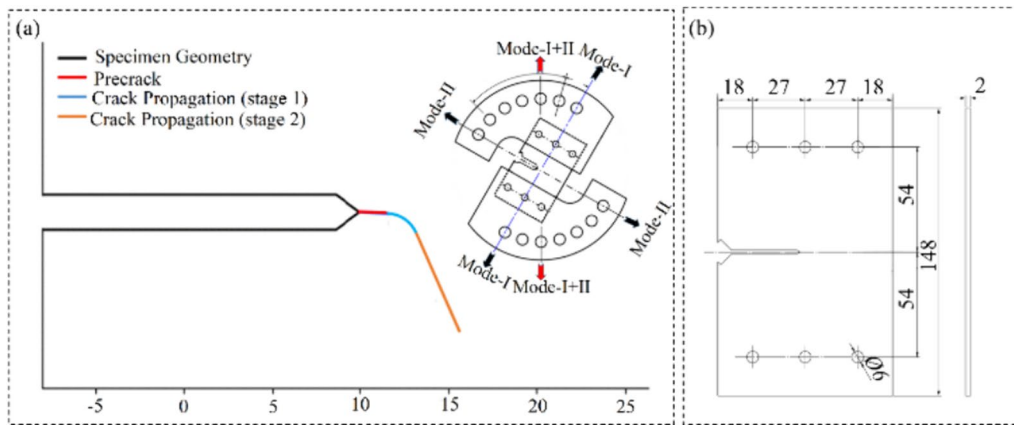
Crack deflection and test loading diagram: a crack deflection stage and fixture, b geometric dimensions of CTS specimen
